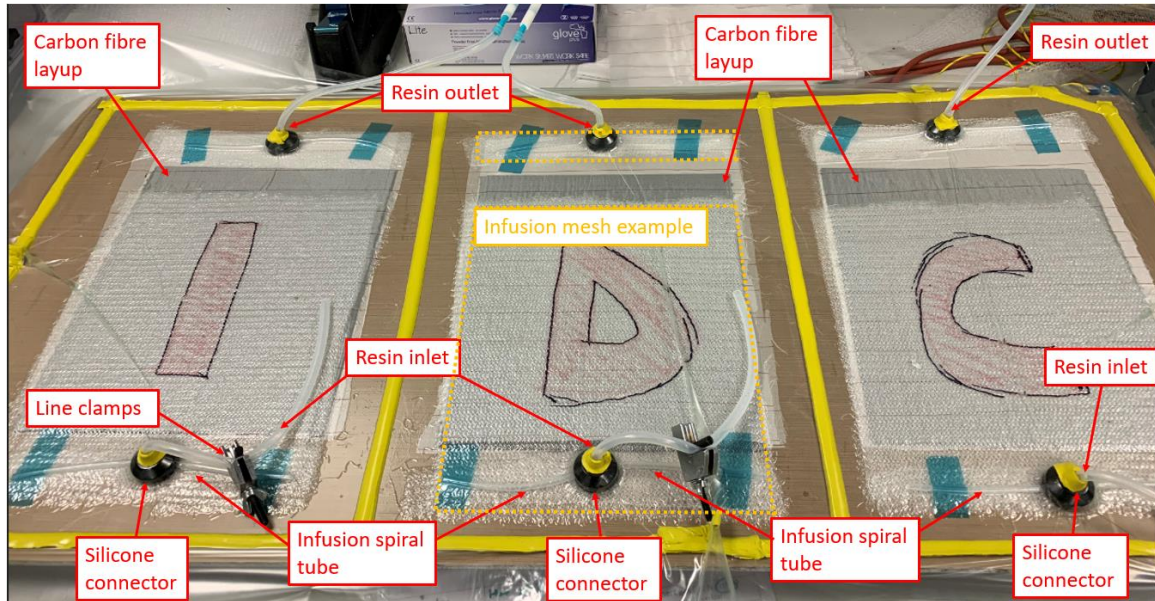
Vacuum Assisted Resin Transfer Moulding setup
